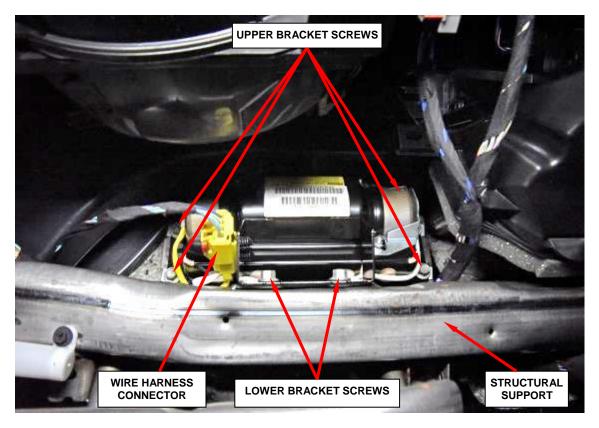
PAB Housing, Inflator and Cushion to be Removed a Unit (View through Glove Box Opening)
